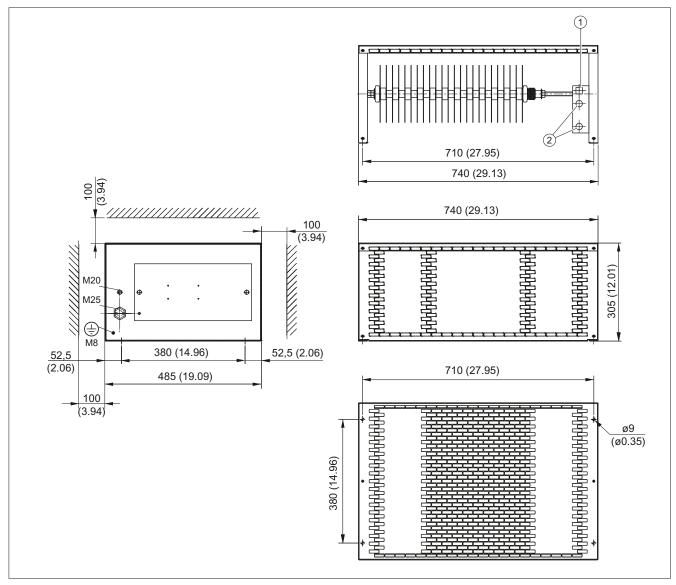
Dimension and installation drawing (roof and wall mounting) of braking resistor 6SE7021-6ES87-2DC0 where $P_n/P_{max} = 2.5 \text{ kW}/15 \text{ kW}$, all dimensions in mm and (inches)
